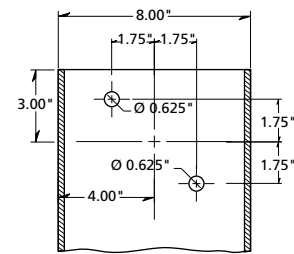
DETAIL POST ASSEMBLY 8 x 6 FRONT ELEVATION
